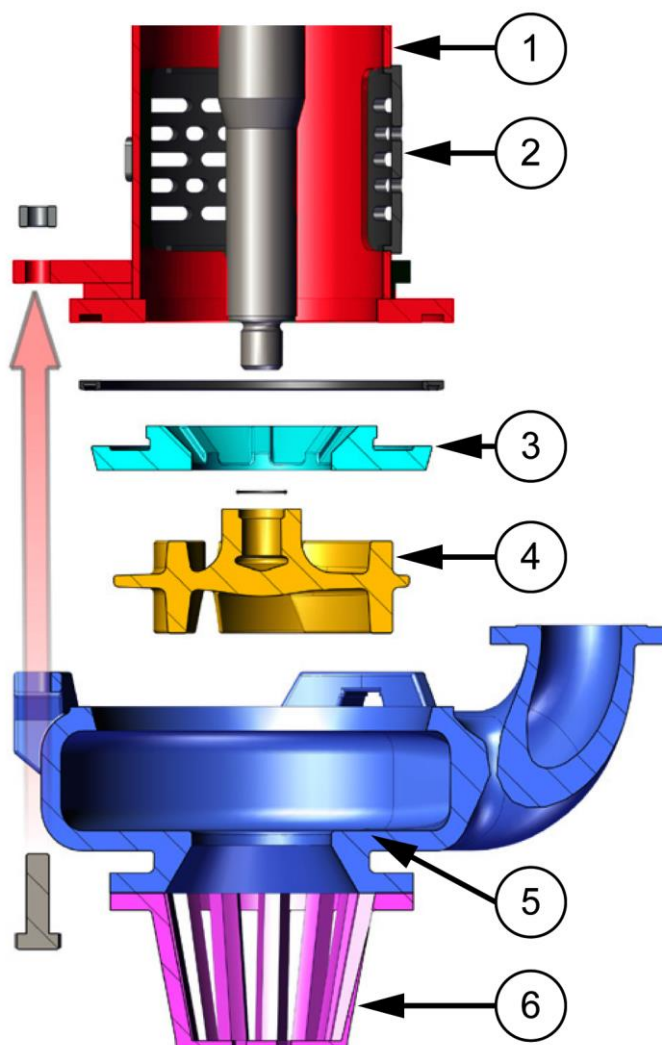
Alignment Fitting Back Liner, Impeller, Casing, and Suction Strainer.
